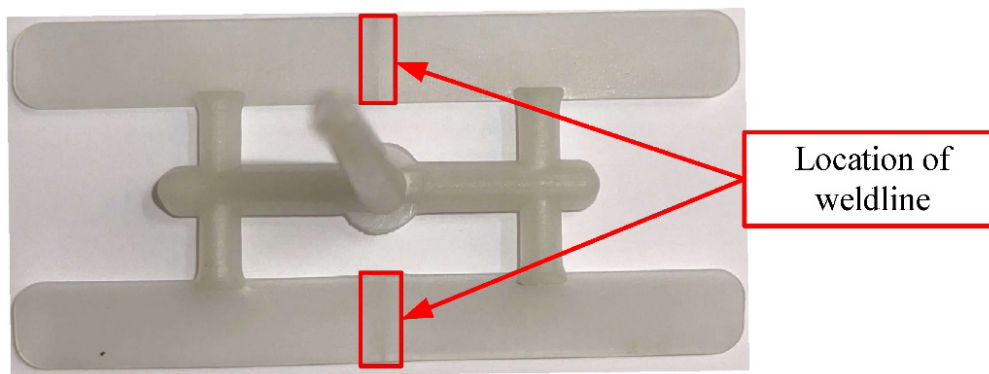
Weld-line location on a bending-test specimen [115].
